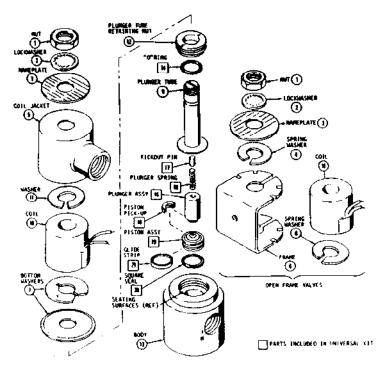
Exploded View of Typical S401 Standard and Open Frame Models
